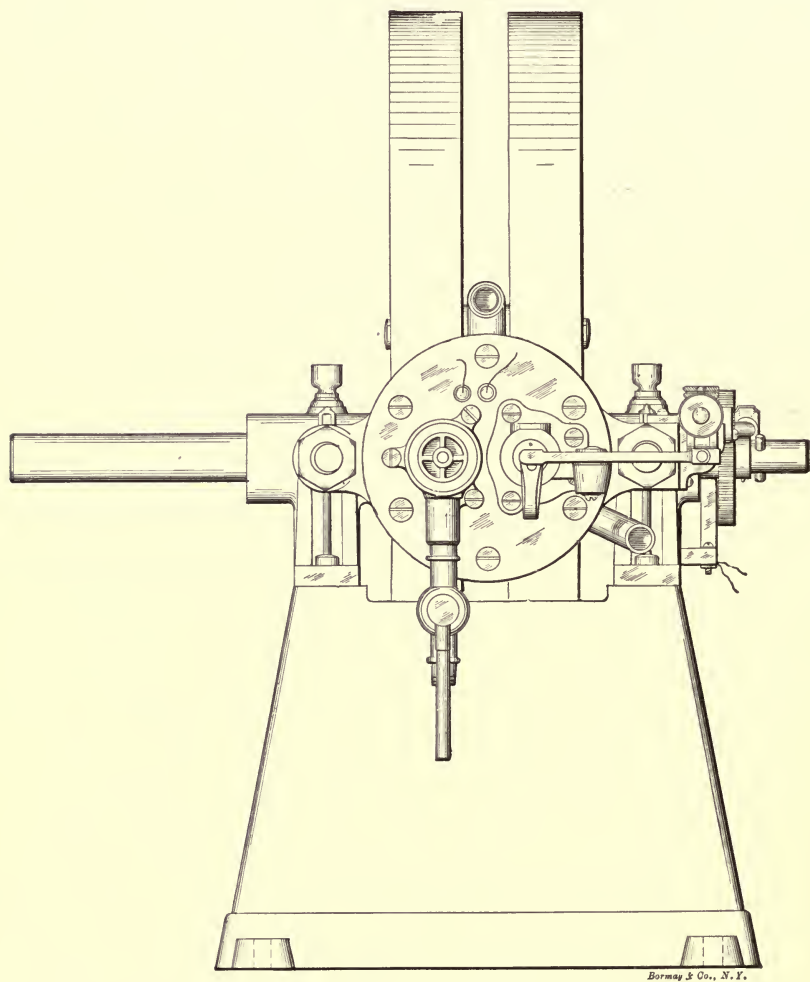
END ELEVATION OF FINISHED ENGINE.
